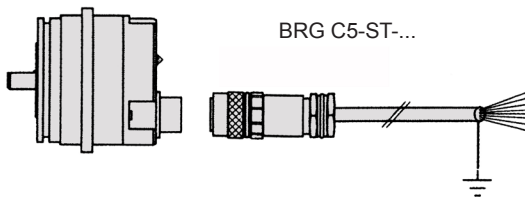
Cable/connector assembly for BRGC5-...-S/SR
